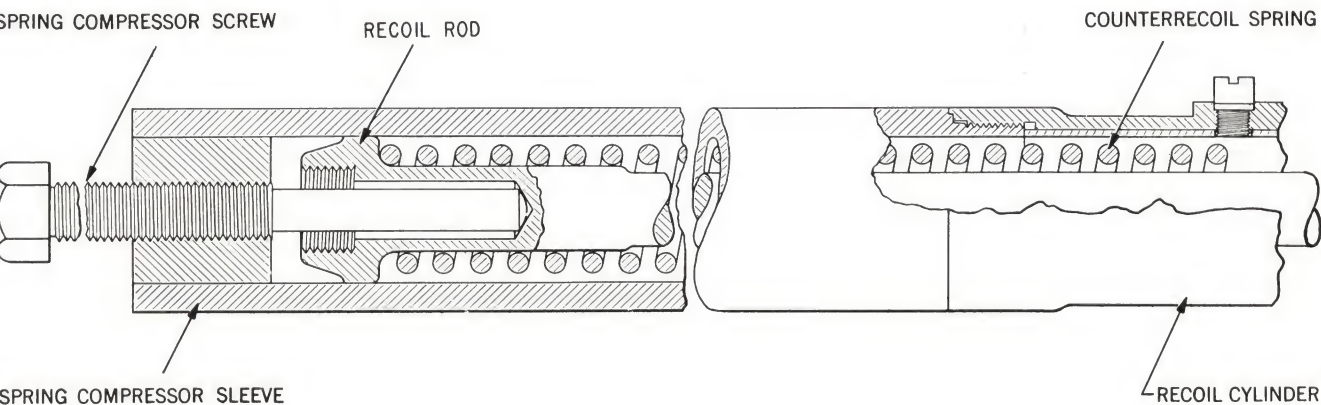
Recoil Cylinder Spring Compressor Tool Operation
